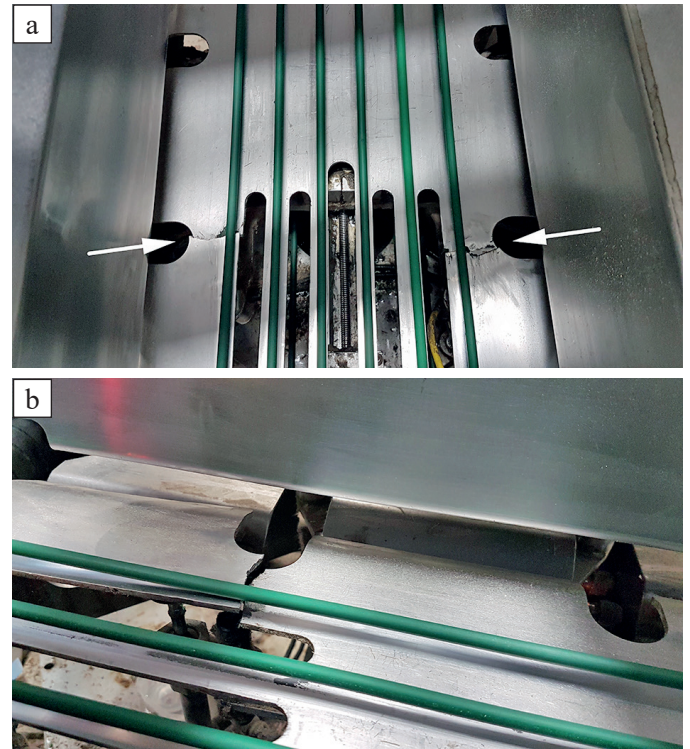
Plate fracture: a) general view, b) detailed view of the crack
